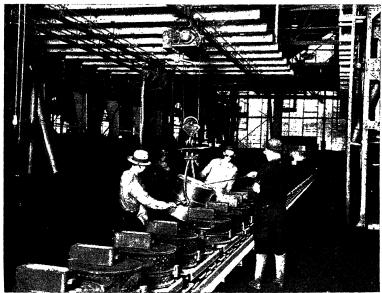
Pouring medium-sized molds on a conveyer. (Link-Belt Co.)
